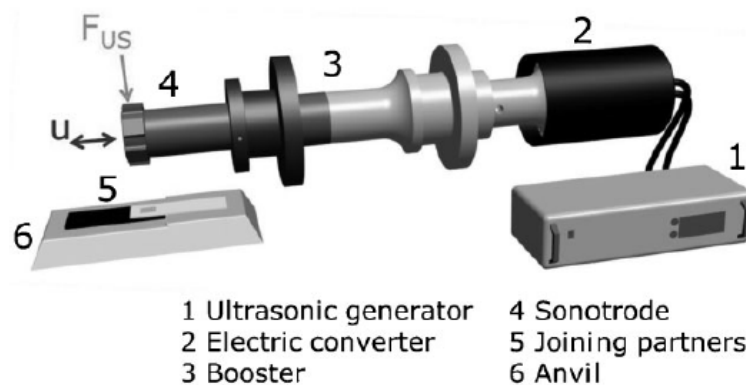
Ultrasonic spot welding scheme (Wagner et al., 2013)
